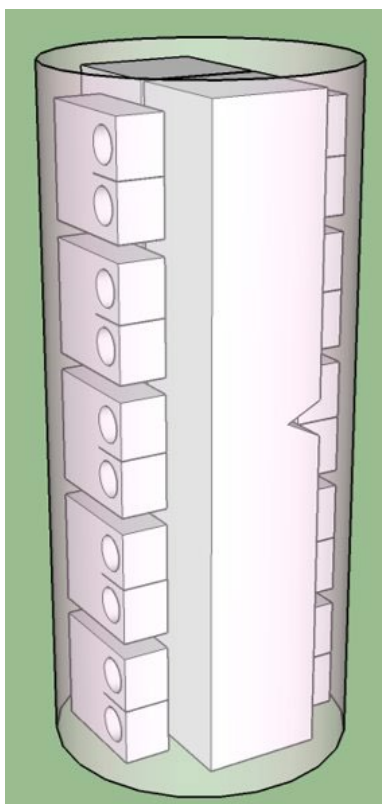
Schemati of Charpy and miniCT machining from a CNA rod sample.
